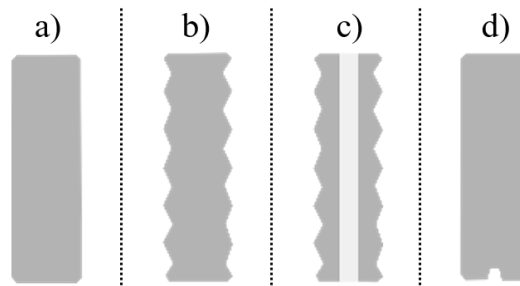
Possible rivet profiles for friction riveted joints: a) plain featureless surface, b) threaded, c) hollow-threaded, and d) semi-hollowed rivet.
